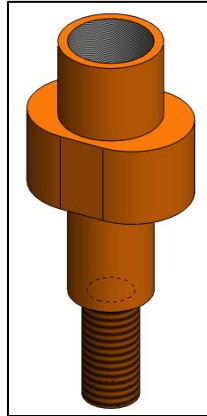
ELLIPTICAL DRILL BIT EXTENSION PIECE
